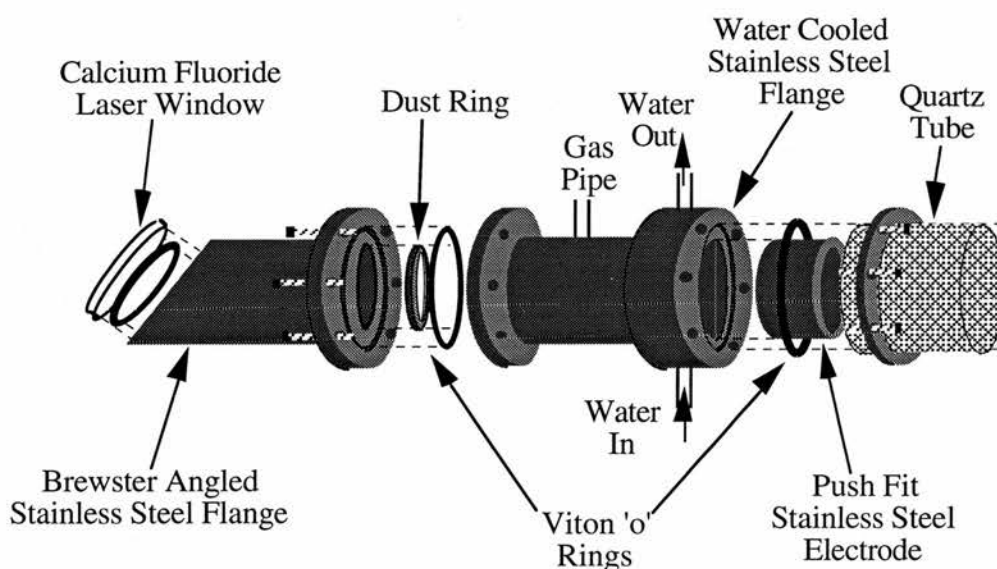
Enlarged view of one of the stainless steel laser head with an electrode and the quartz outer tube.
